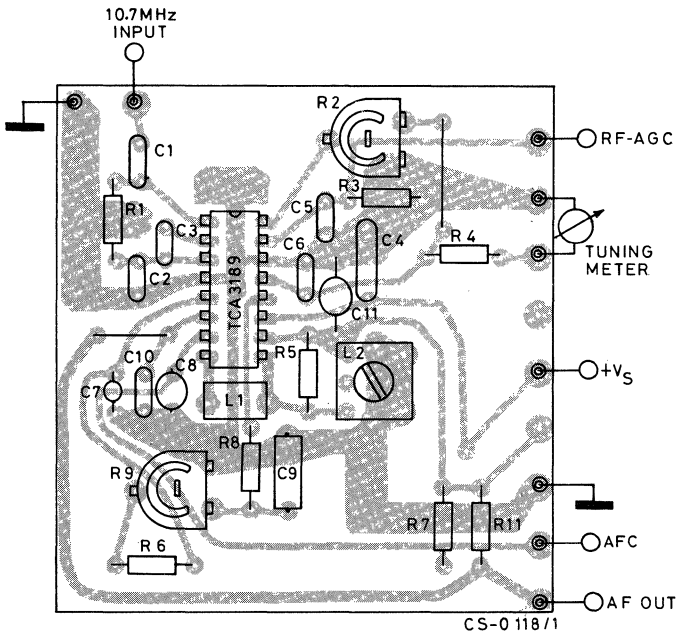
P.C. board and component layout of the single tuned circuit (1:1 scale)
